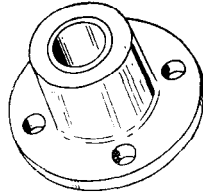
BABBITTED FLANGED BEARING BLOCK
